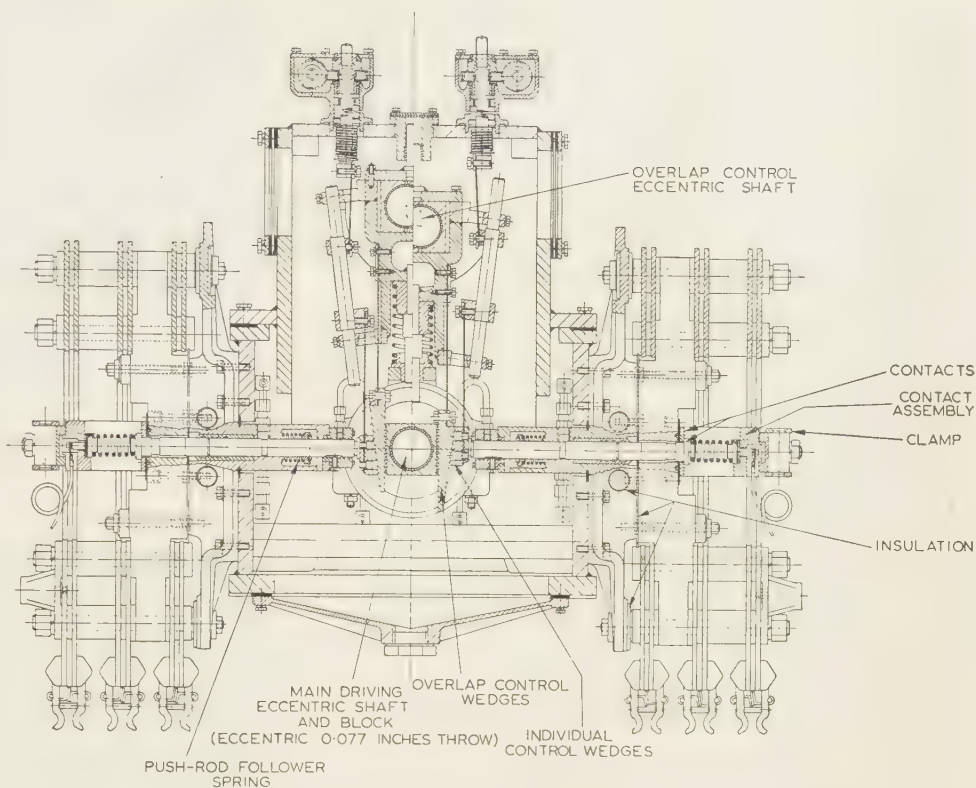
Sectional view of one phase-assembly with its relationship to actuating contacts.
